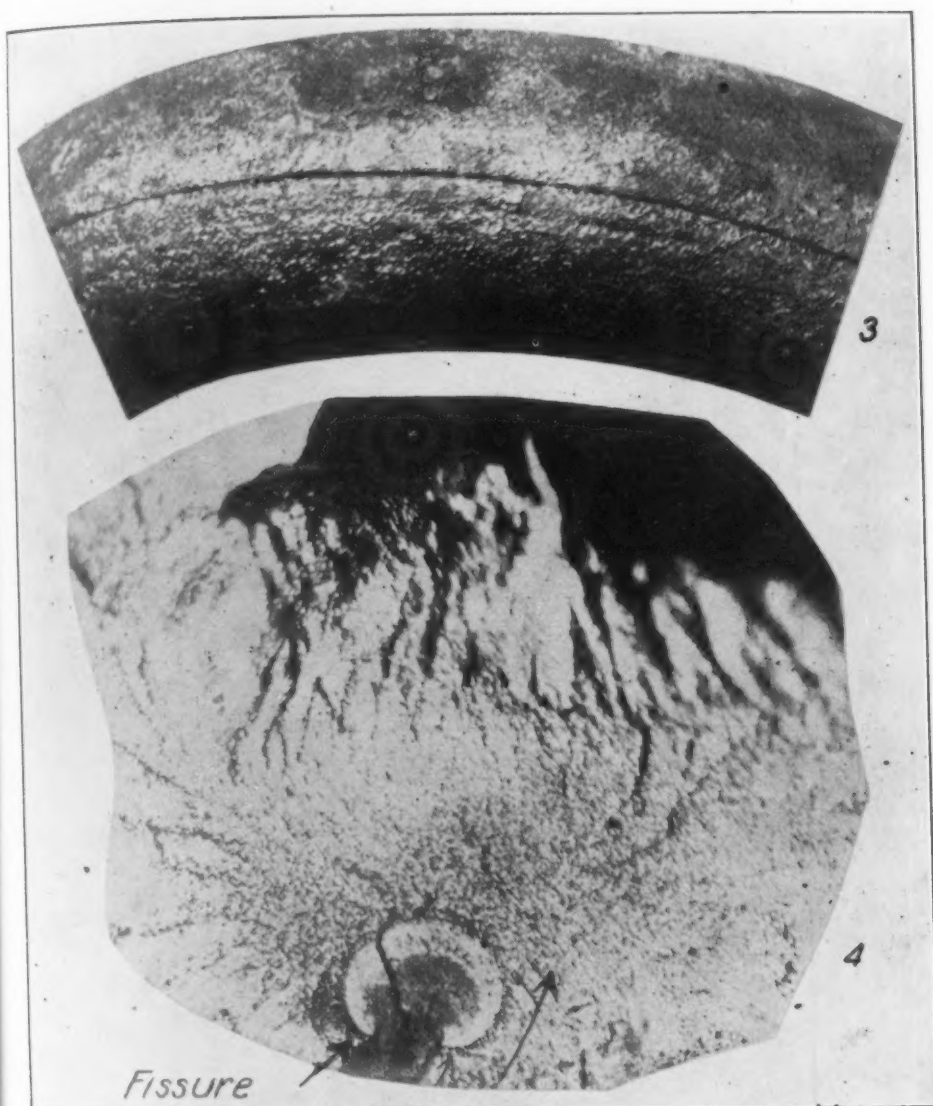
Failed Helical Spring. Fig. 4—Failed Helical Spring. Fractured End.
